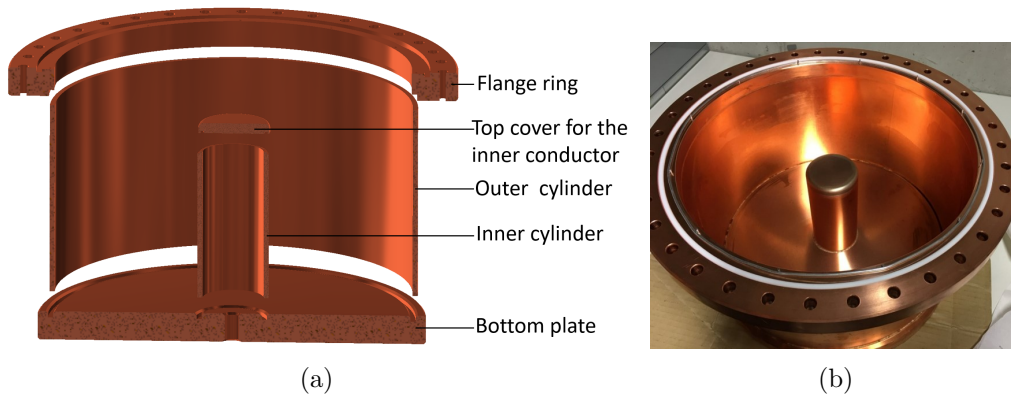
Structure of the main part of the cavity. (a). Cross section view of the cavity with separate parts. (b). Cavity after being vacuum brazed with silver in GSI.
